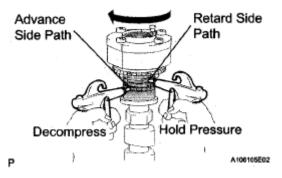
Checking Camshaft Timing Exhaust Gear Turns In Retard Direction
